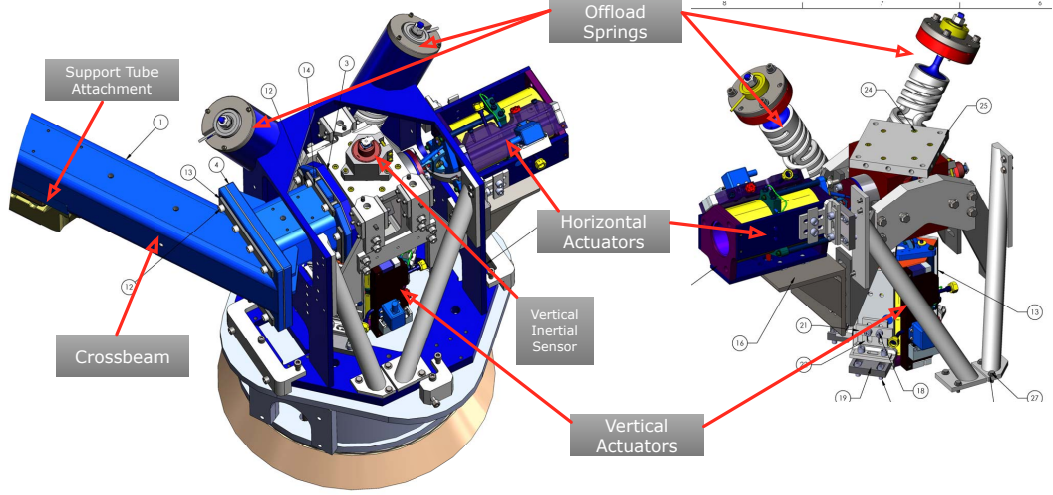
Engineering drawings of a HEPI corner or “pier”, shown on the left with the housing and crossbeam included, and on the right with the housing removed to expose the offload springs. The position sensors and horizontal inertial sensor are not easily visible from these viewpoints.
